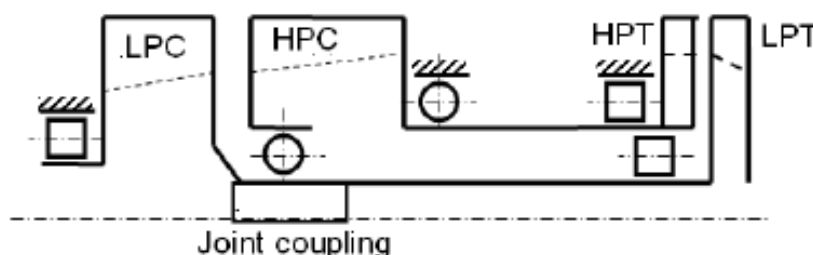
Shafting of two-spool ATJE with intershaft bearings
